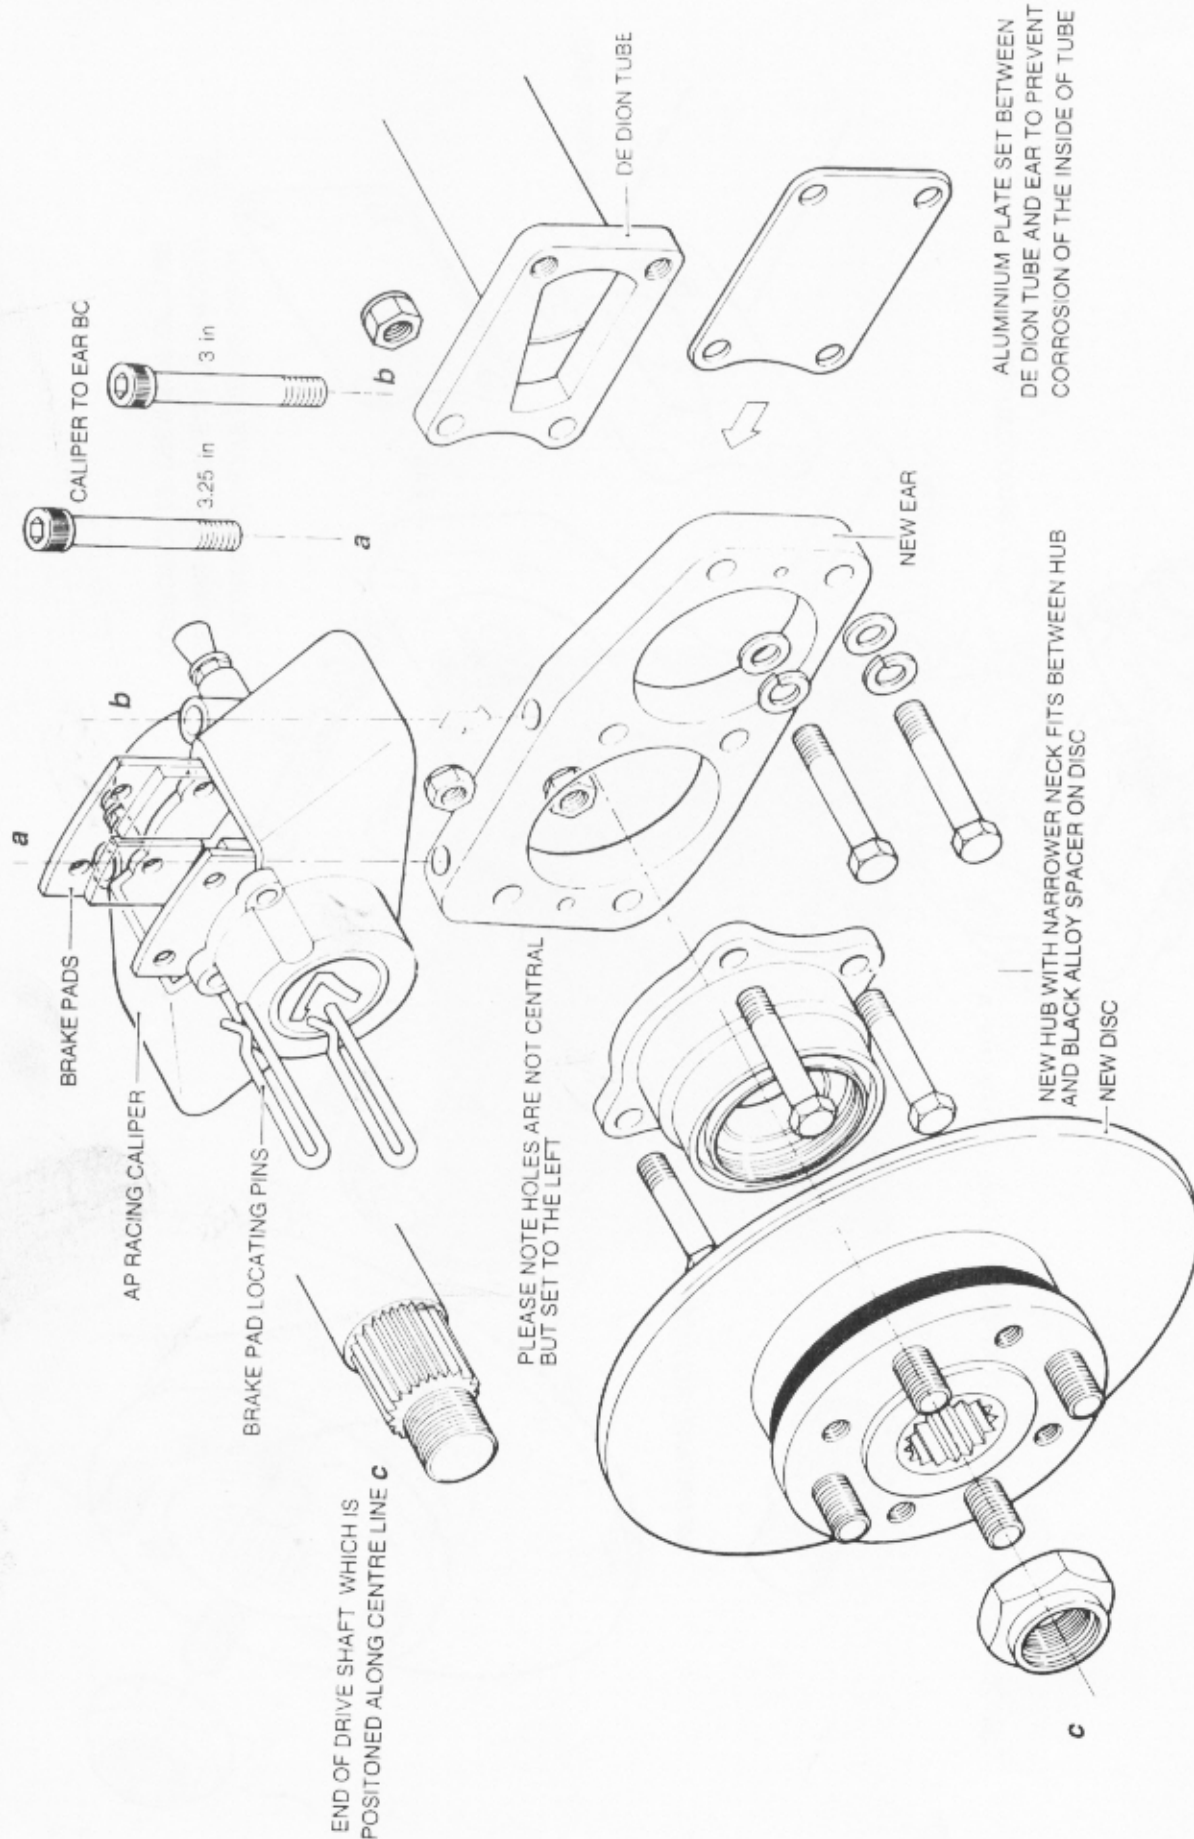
A Rear Hub and Brake Assembly (Standard Brakes)
